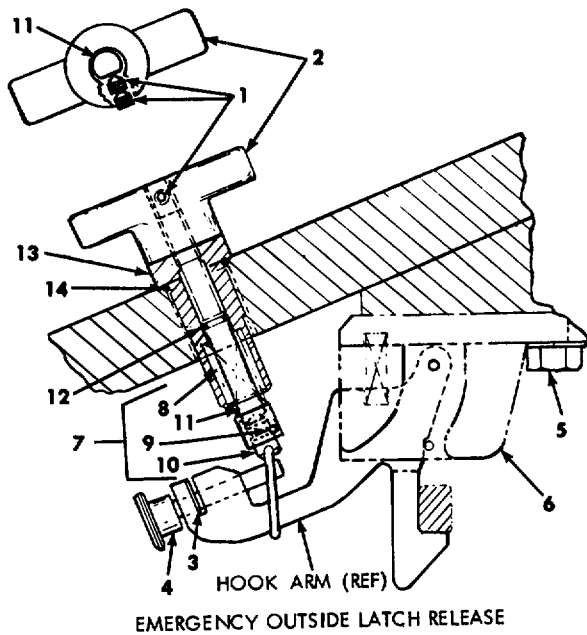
Removal/installation - driver's rotatable hatch locking latch, grip, and o bumpers
